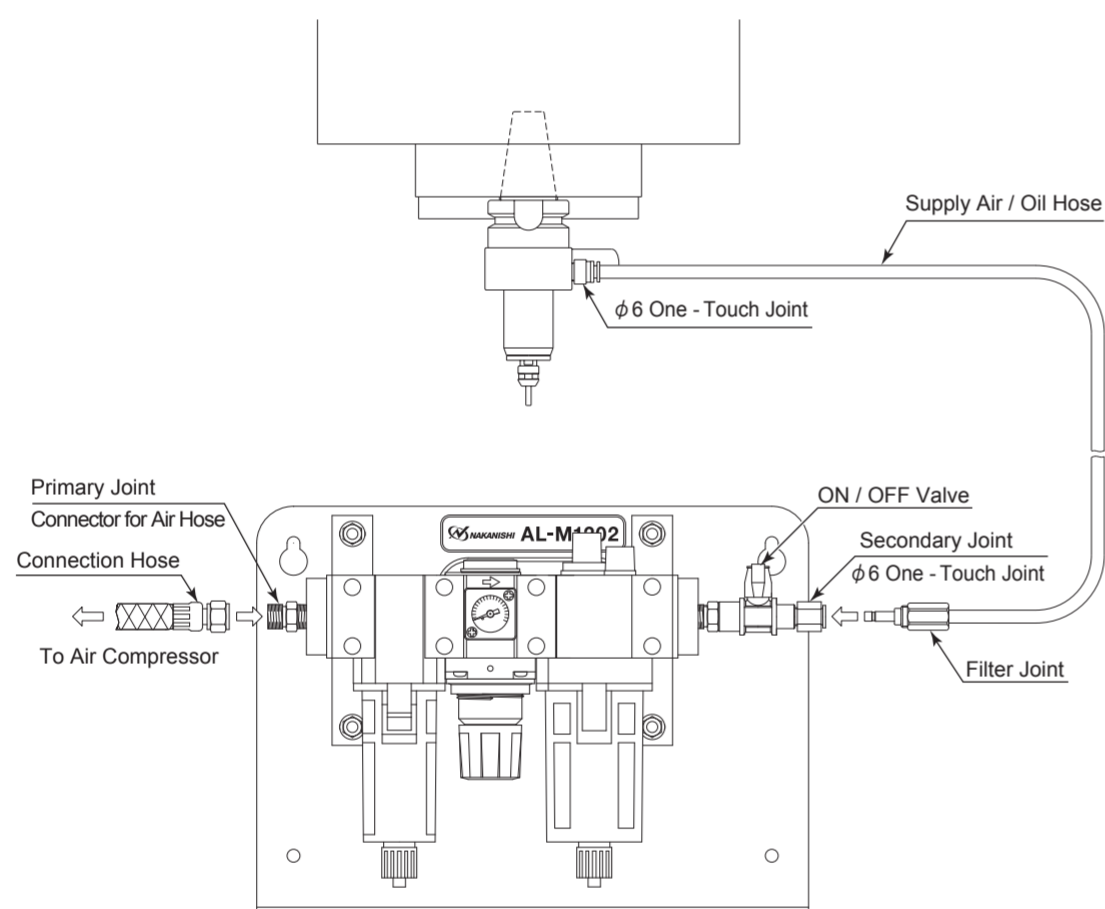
Connection of Air Line Kit " AL - M1202 (Sold Separately) "
